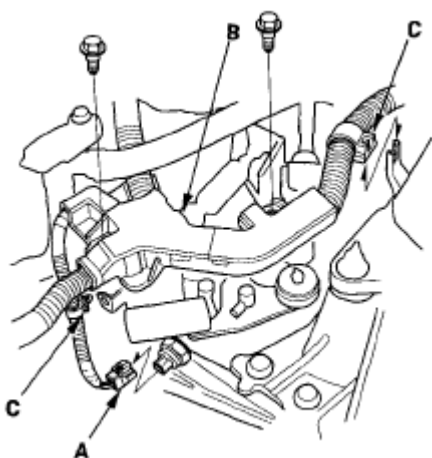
Identifying Back-Up Light Switch Connector And Engine Harness Cover
